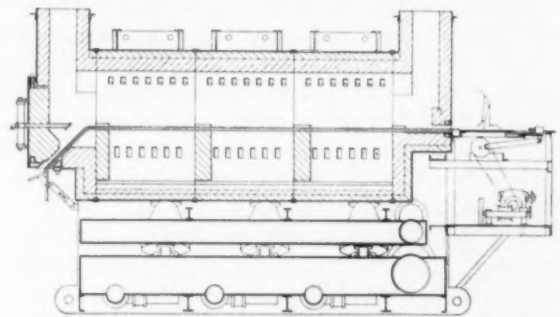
View shows longitudinal section of the billet heating furnace. Accessory equipment supplies combustible gas mixture under pressure and pushes billets through furnace.
